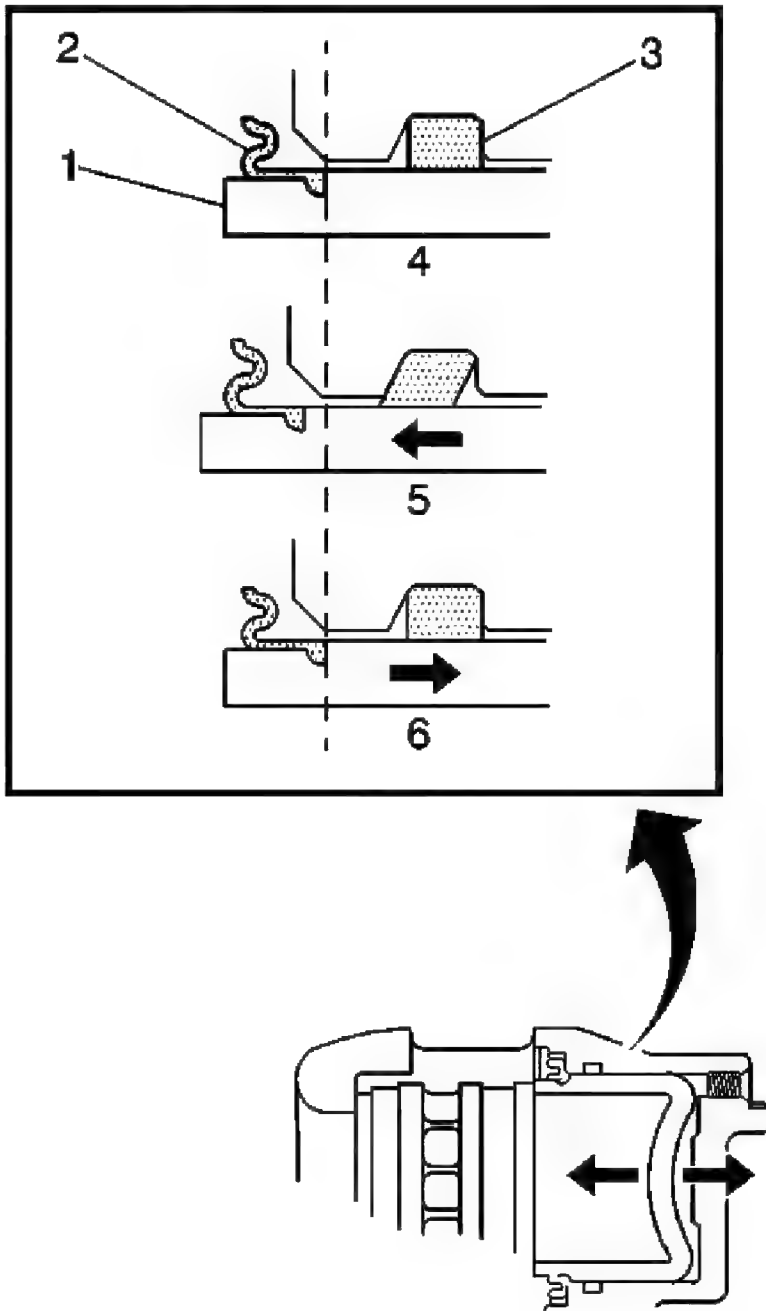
Identifying Brake Caliper/Pad Inspection Areas
